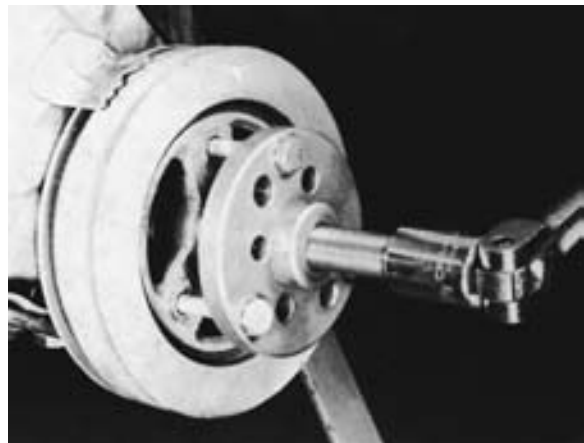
Puller being used to pull the vibration damper from the crankshaft.
